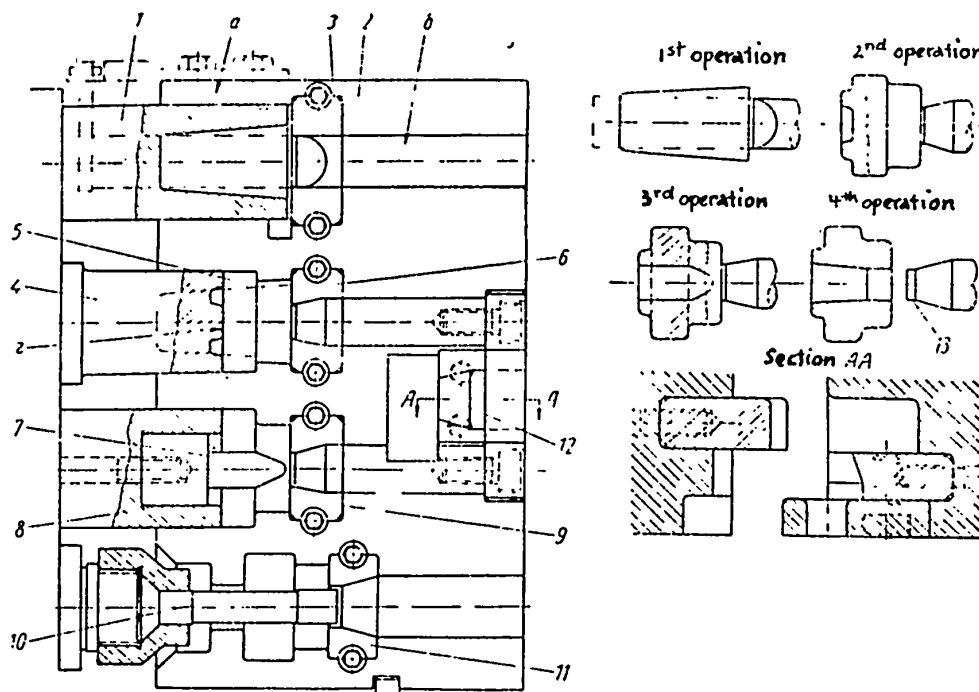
The Design of the Die for a Horizontal Forging Machine
